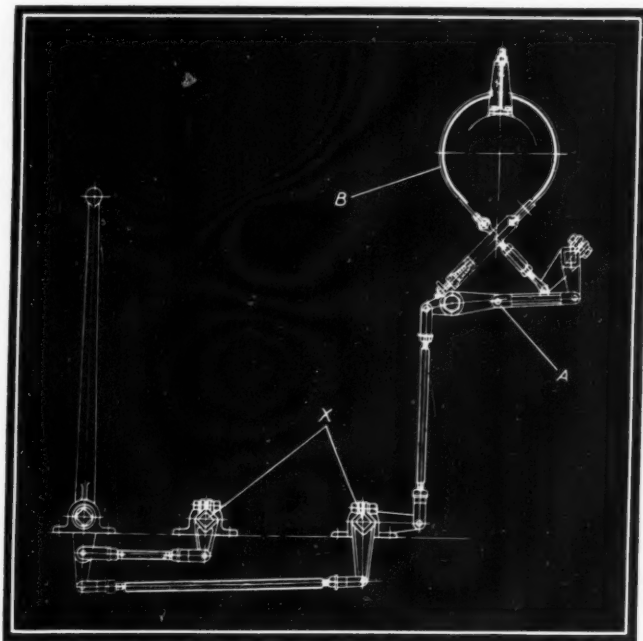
Employment of square shafts and toggle joints insures positive action of the control mechanism
